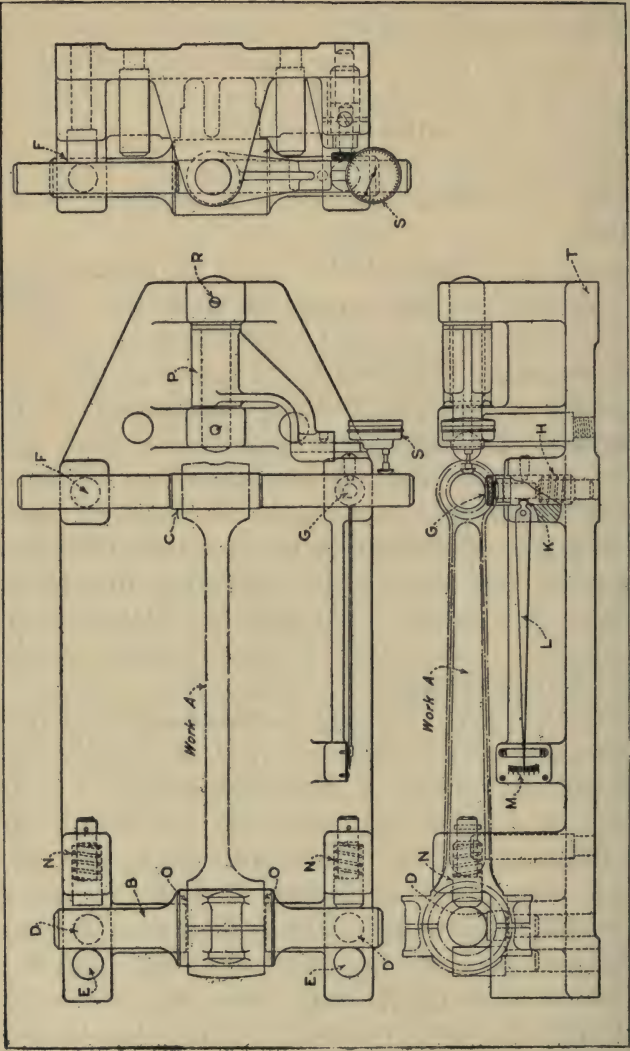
INDICATING GAUGE FOR TESTING ALIGNMENT
